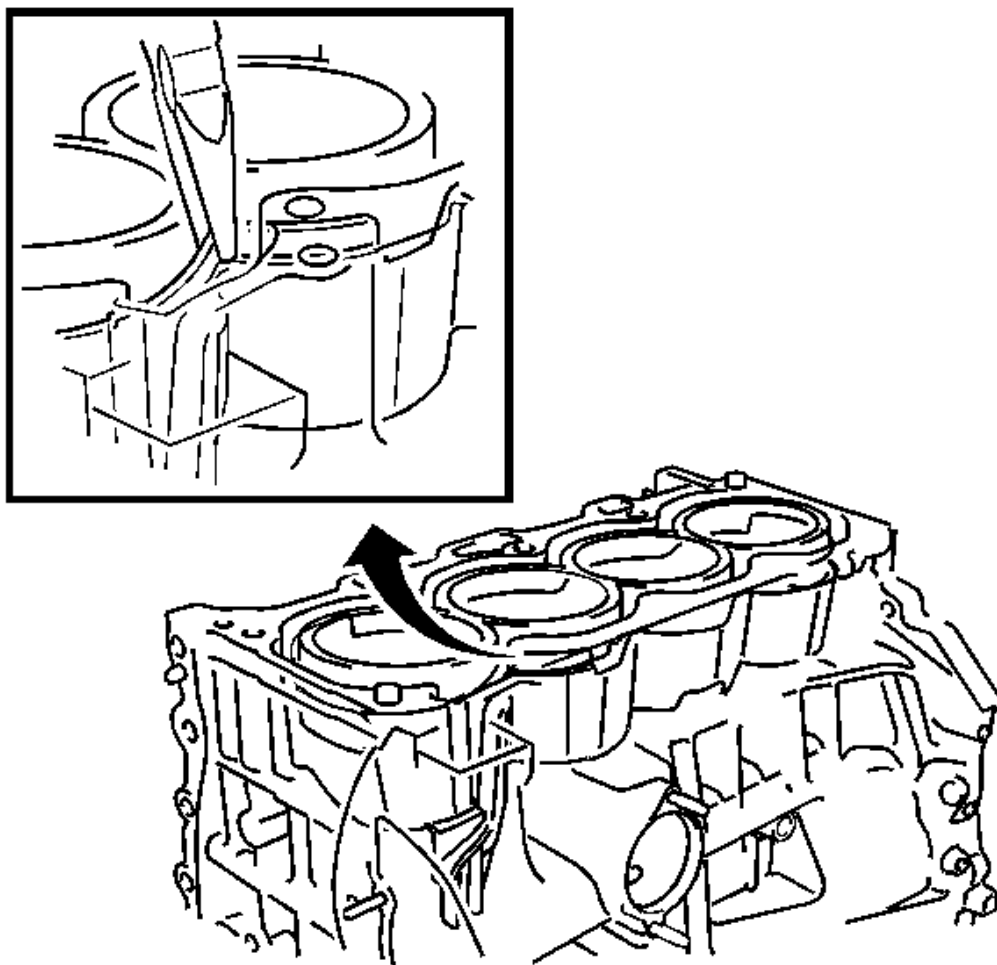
Identifying Cylinder Block Water Jacket Spacer
